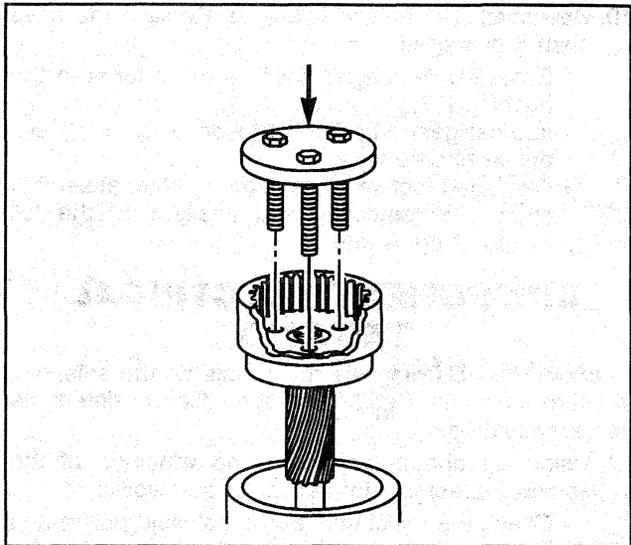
Tool for Removing Center Support Bearing (Installation View)
